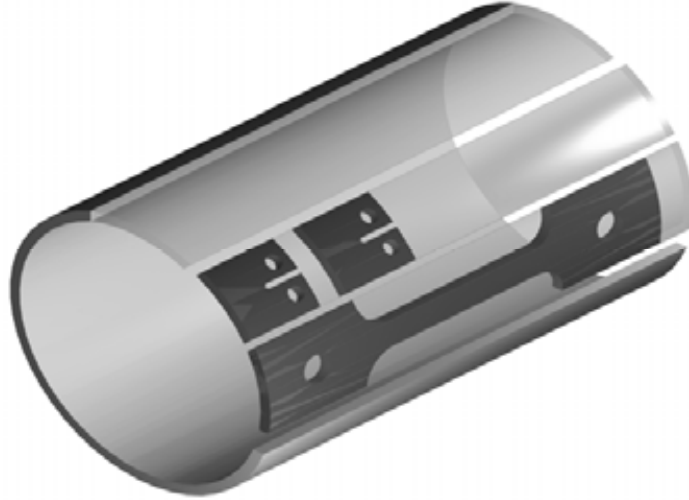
Specimens extracted from the rod and used in tension and fracture mechanics tests.
